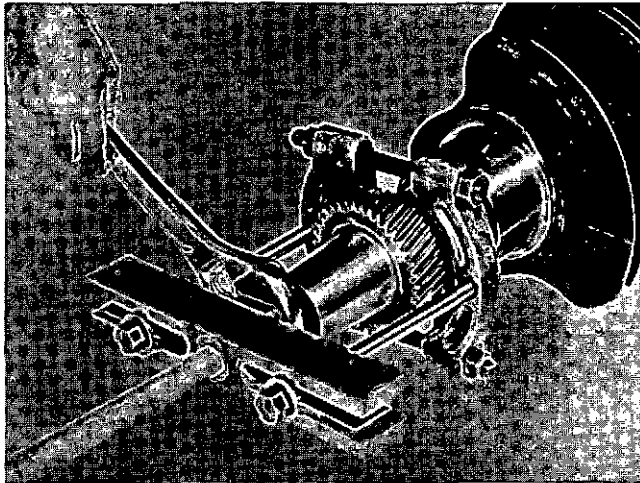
, V40142. Pulling crankshaft gear with ring-type puller
